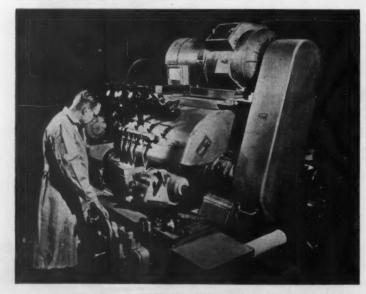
Multiple-wheel grinder designed to complete several diameters on a shaft simultaneously
